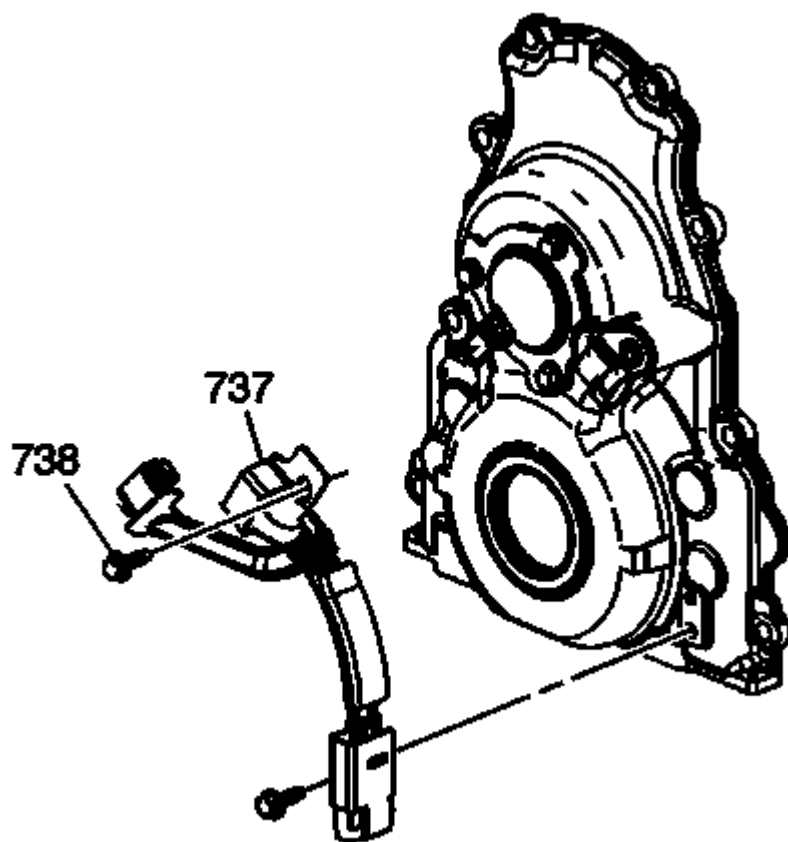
View Of CMP Sensor Wire Harness & Bolts
